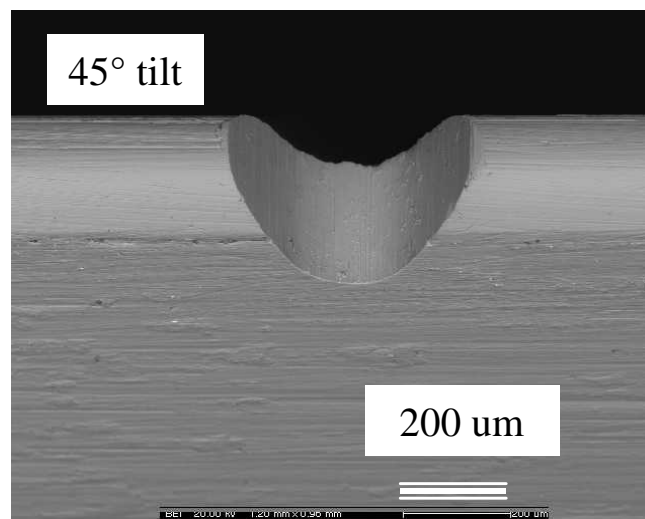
Small-machined notches in the Ti-17 sharp tip bend bar geometry
